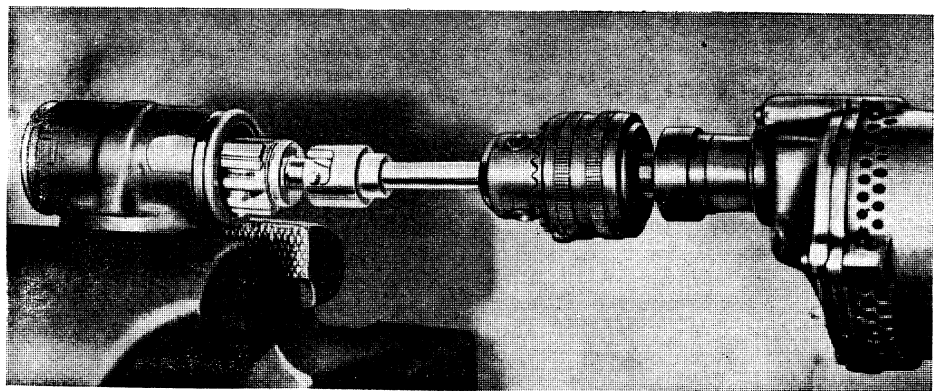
Using hone to clean up master or wheel cylinder (wheel cylinder shown)
